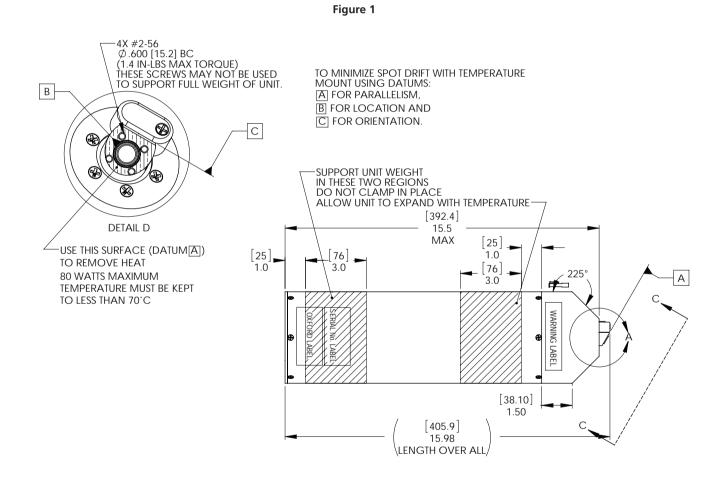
shows a portion of outline Drawing Number 8236. In the lower right corner of the drawing there is a view which indicates the surface that should be used to remove heat from the unit. Some heat also travels up the side of the conical cover but air blowing on this conical surface alone is not sufficient to cool the unit adequately. A heat sink must be attached to the surface indicated. The style of the heat sink is up to the user and will depend upon the location of other devices or mechanisms used in conjunction with this X-ray source.
